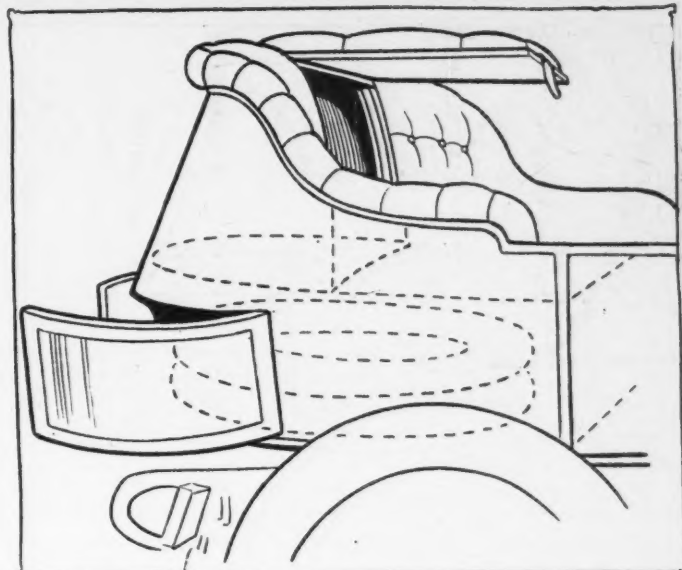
LUGGAGE CAPACITY OF PALMER & SINGER CARS
